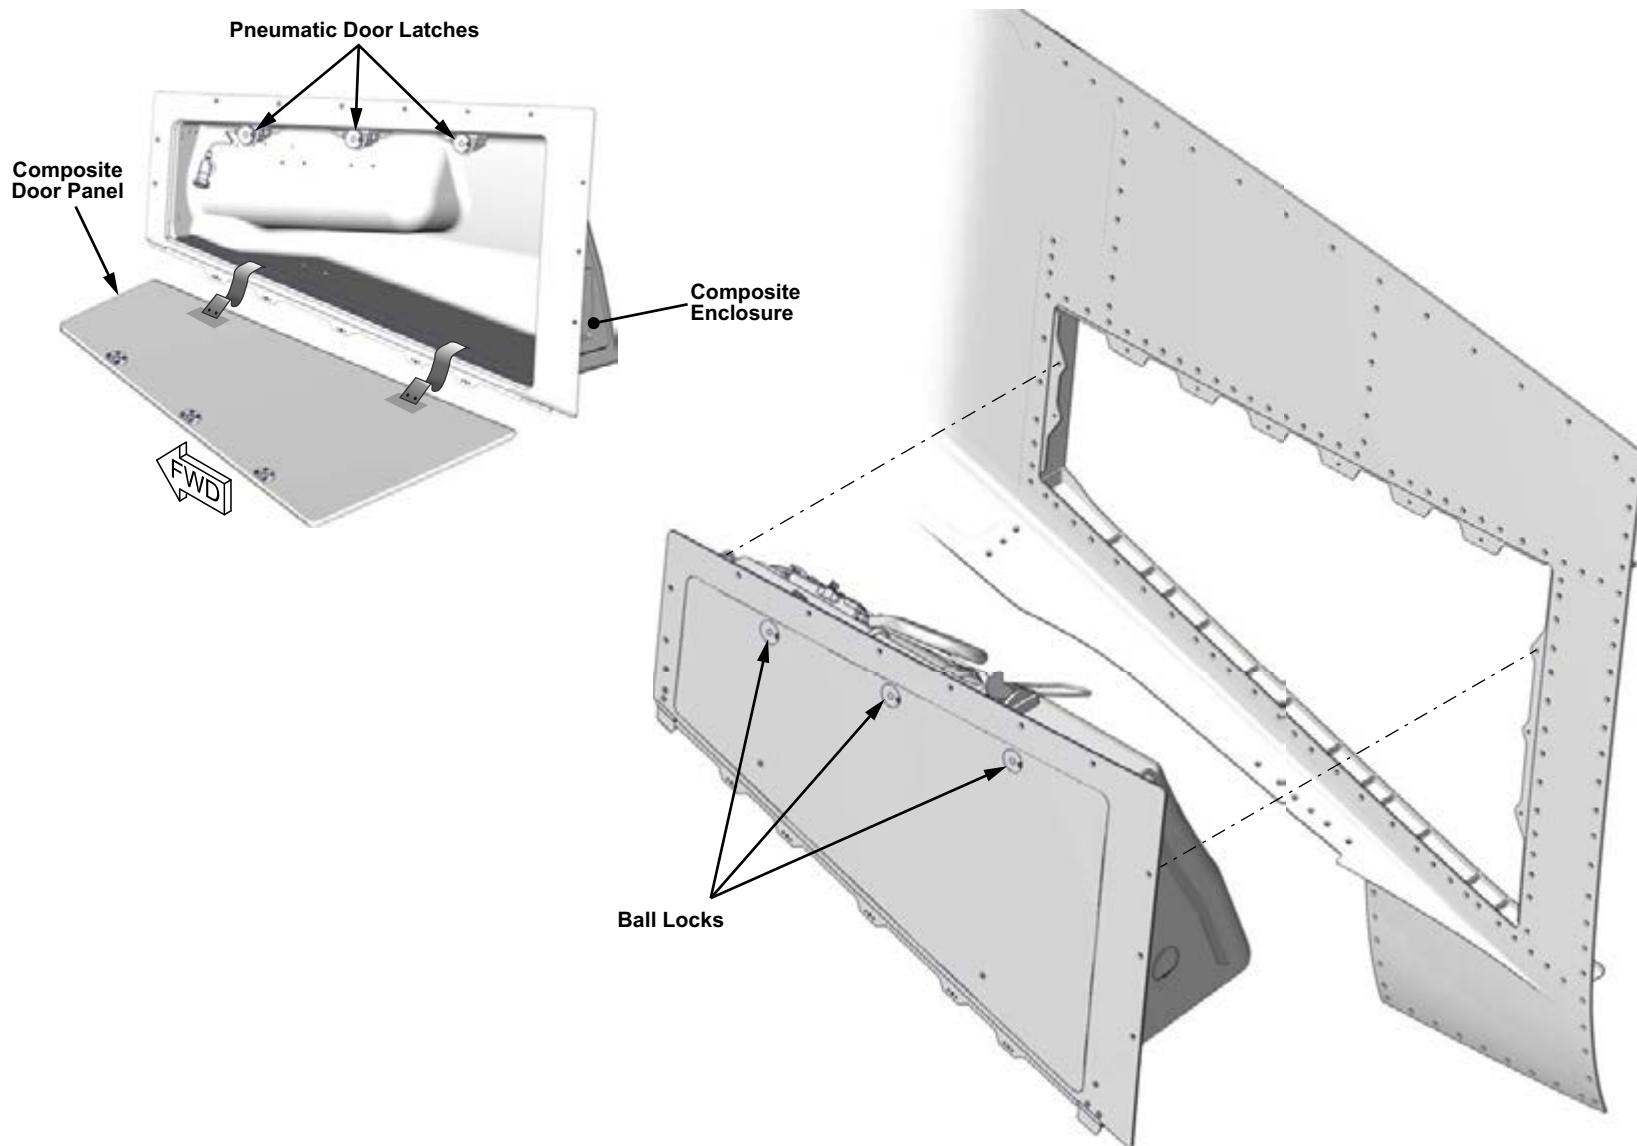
Overwing Emergency Exit Door Slide Enclosure
